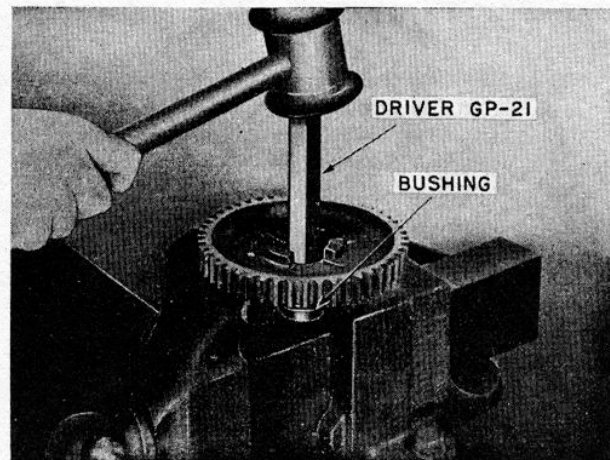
REMOVING BUSHING FROM LOW-SPEED GEAR
